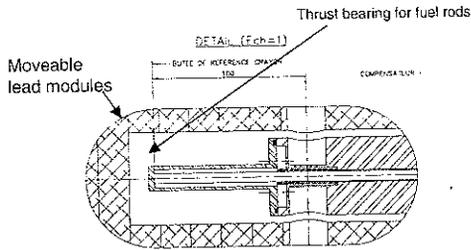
Stack of lead modules/shielding of the Fabrice rod
